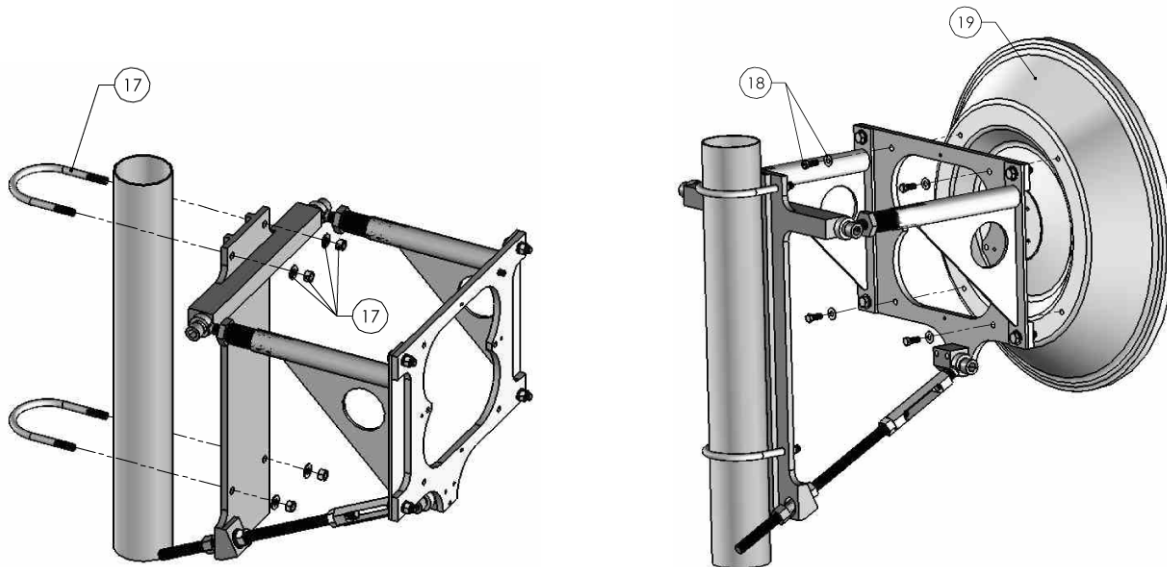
Attaching Assembly to Mast and Attach Antenna.
